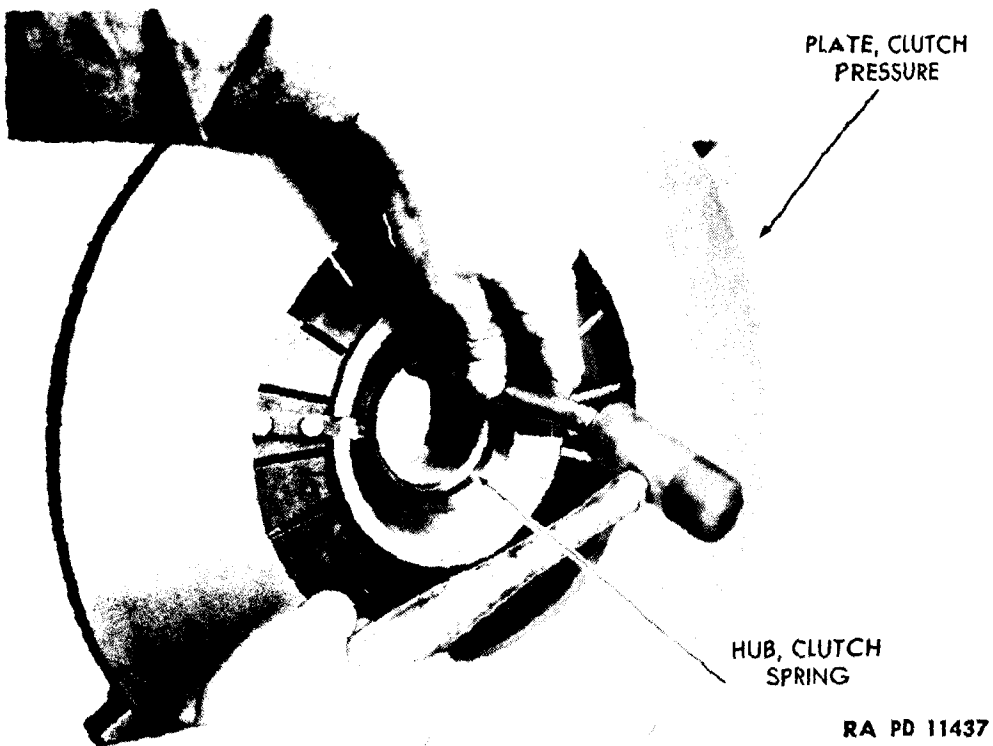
Removing Clutch Release Bearing Sleeve Assembly
